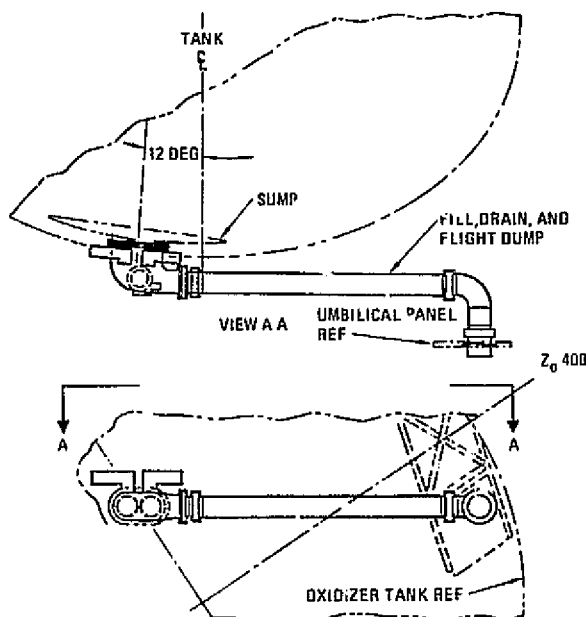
Recommended LO₂ Tank Outlet Configuration
